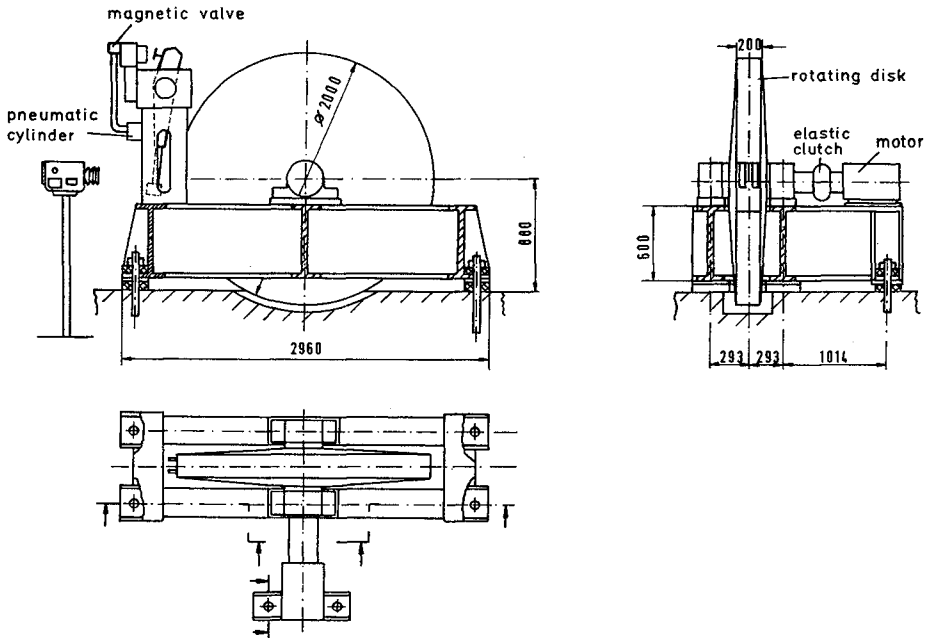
33 MJ rotating disk impact machine at MPA-Stuttgart
